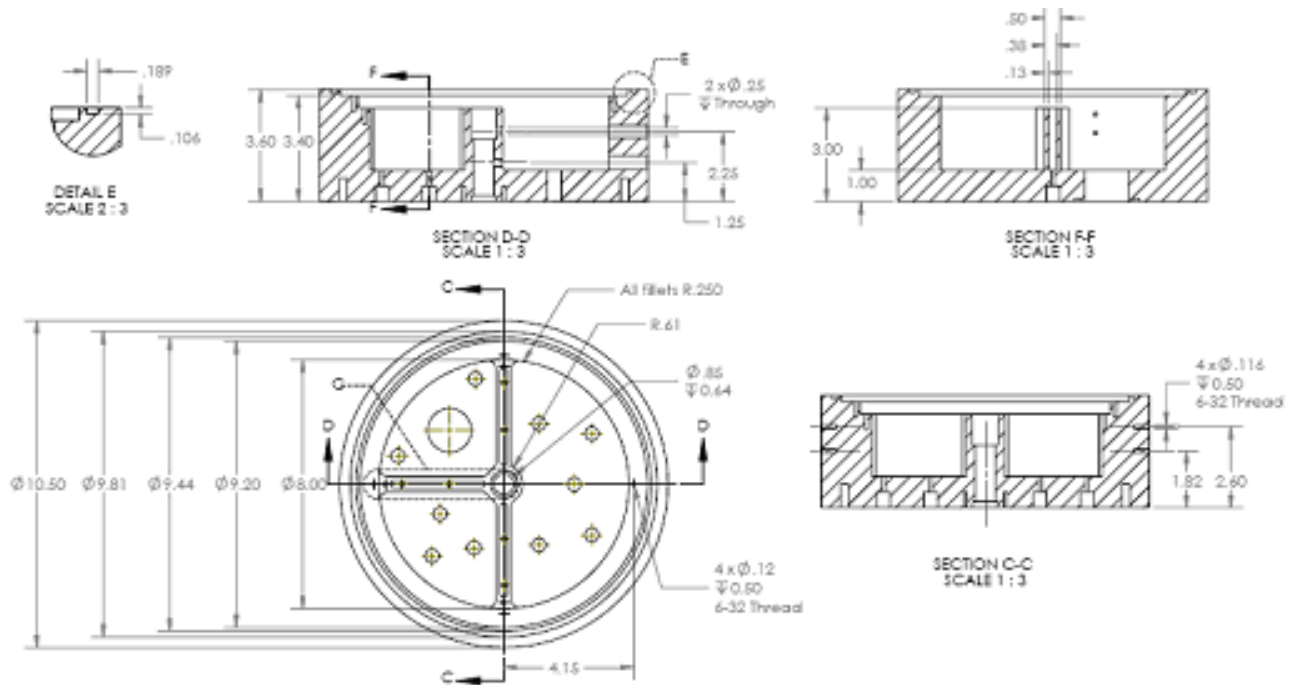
Engineering drawing of main processing chamber (top views and cross section)
